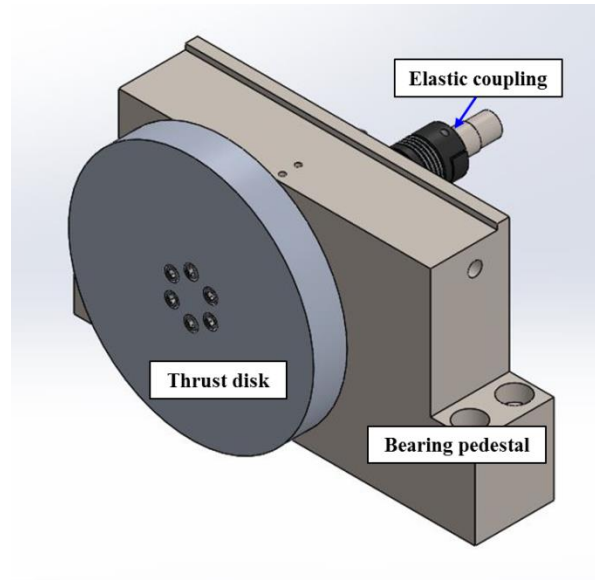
Isometric view of a ball bearing pedestal and rotating shaft assembly.
